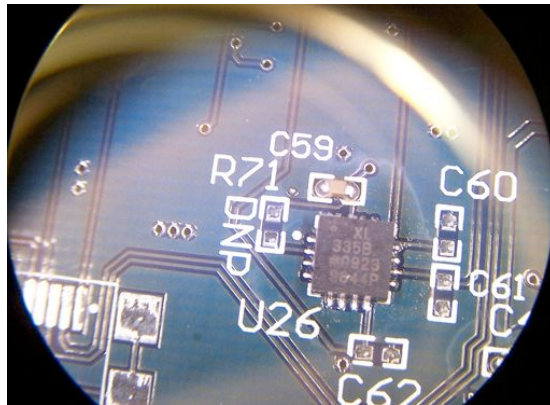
Photograph of QFN package IC successfully soldered to PCB, viewed under a stereo microscope.
